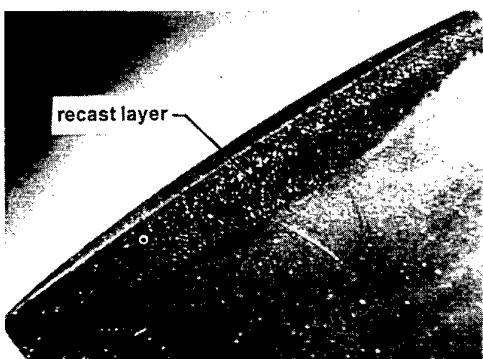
Rotor blade, concave side, showing black Ti-Ni
